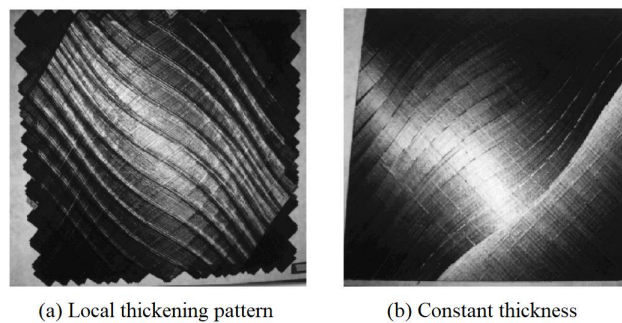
AFP Panels with (a) local thickening pattern and (b) constant thickness due to cut-restart technique [28]
